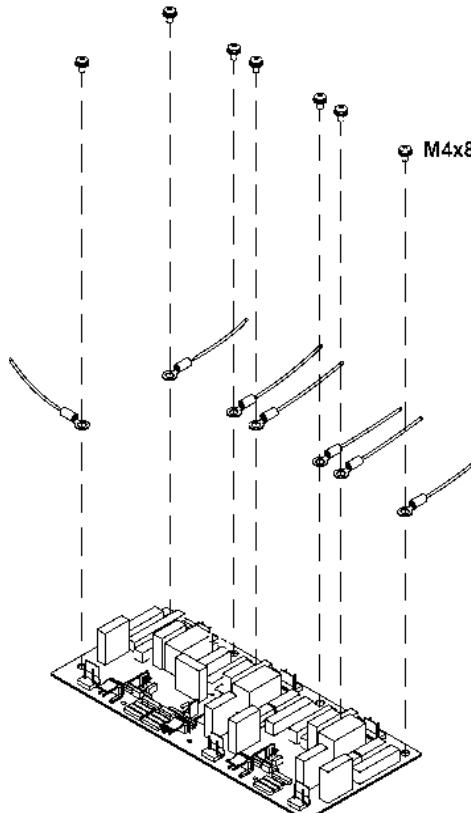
(a). Disassembly of the Snubber, Trigger and Soft Charge protection
